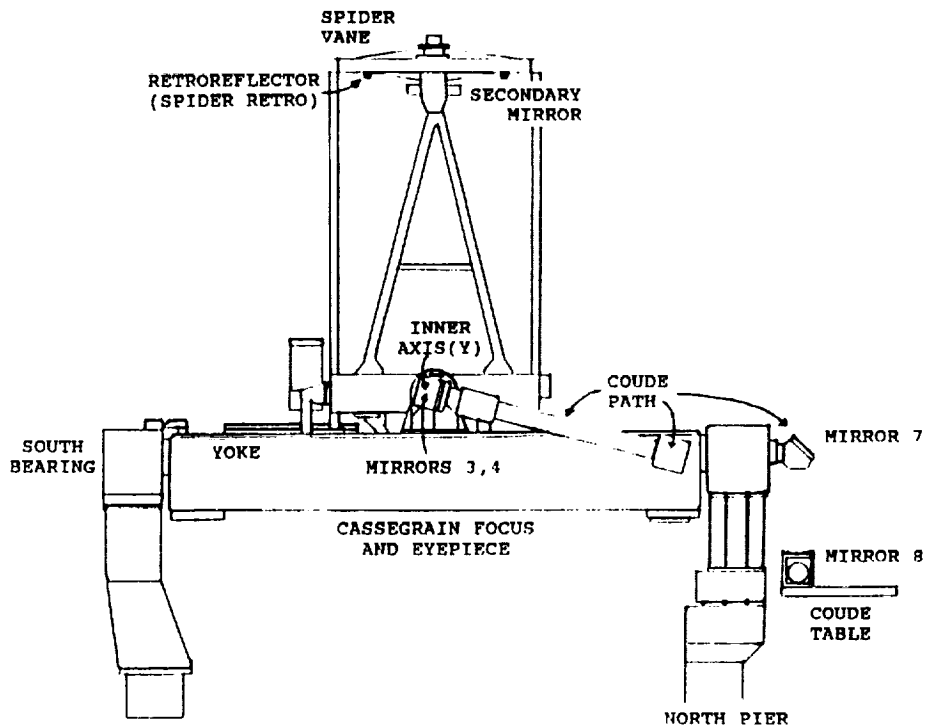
Orroral Laser Ranging System telescope - elevation and plan. (Derived from Contraves 'NLRs Telescope Manual'.)
